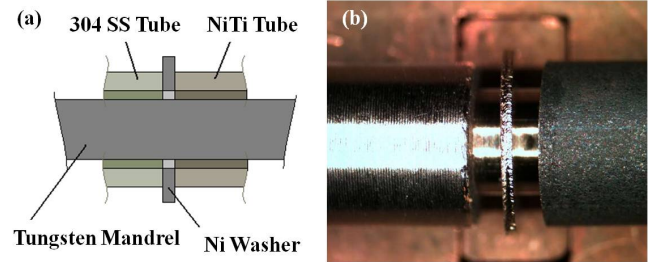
(a) CUTAWAY DIAGRAM OF ASSEMBLED NiTi/304 SS PILOT SAMPLE; (b) PILOT JOINT PRIOR TO WELDING.
